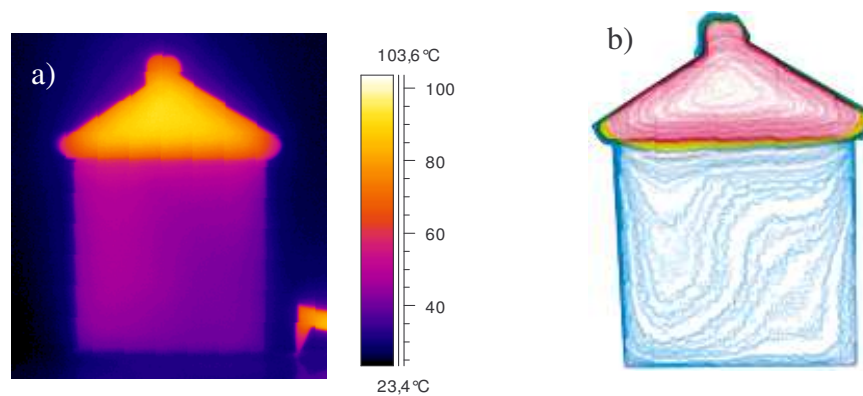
The photos of moulding taken using thermovision camera: a) the photo before processing, b) the photo after the processing using finding of edge (isotherm lines) procedure
